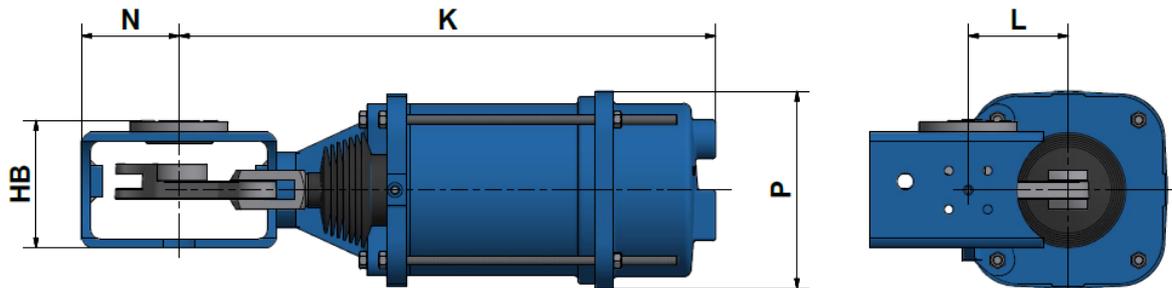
Dimensional drawing for Type R Actuators with VETEC console
